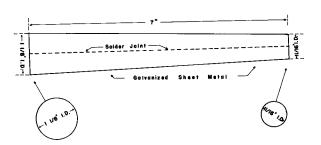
Homemade cone-shaped extension tube attachment for use with auto hand vacuum cleaner.
